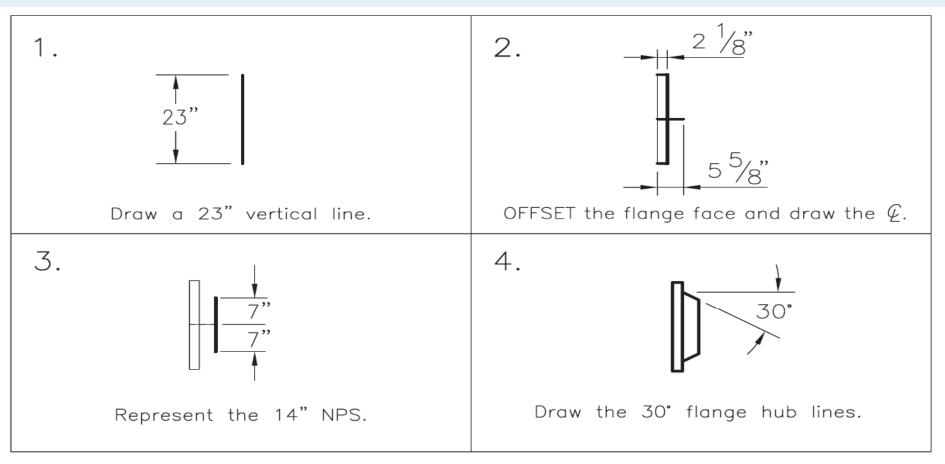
Drawing procedures for a 14"-300#RFWN flange.
